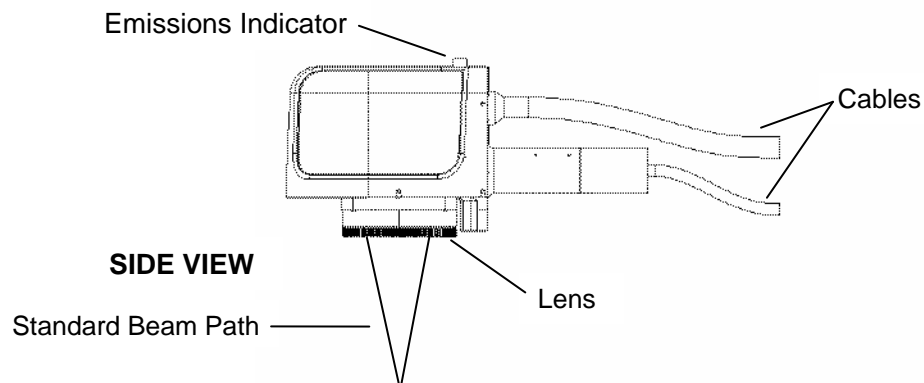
Side View of Standard Marking Head Assembly Configuration
